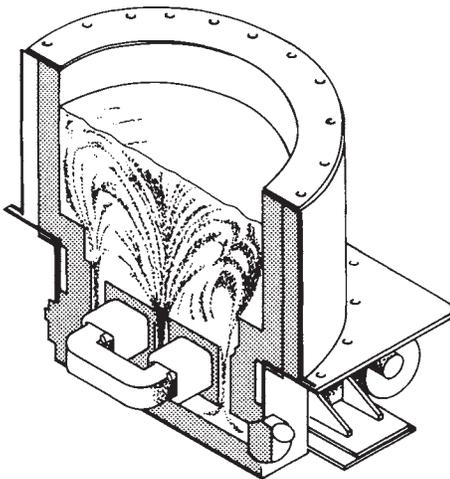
Cutaway drawing of a twin-channel induction melting furnace
